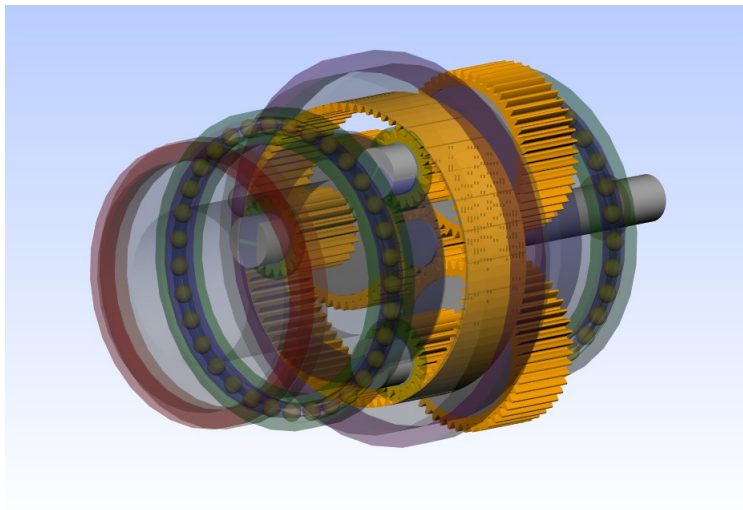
Baseline gearbox design in MASTA. Gears in orange, bearings in green and blue, output in red and housing in purple.
